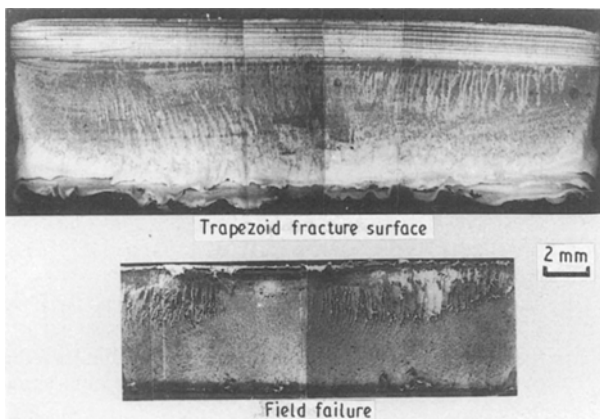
Fracture surfaces of trapezoid specimen and field-failed pipe [22]. The crack propagation direction is from top to bottom.
